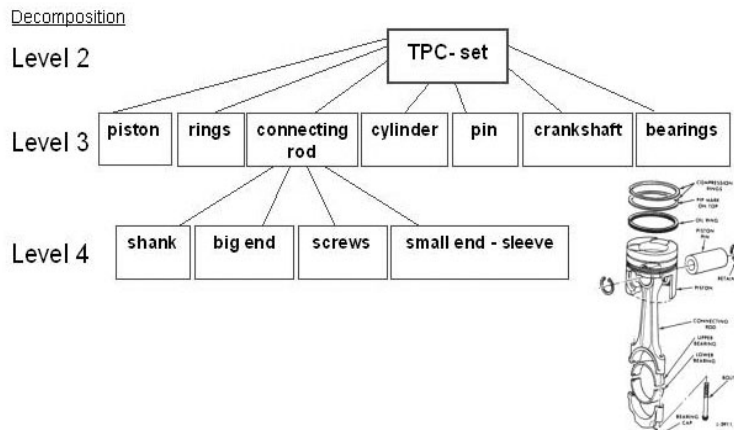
Structure of open constructional system of piston-rings-cylinder set
